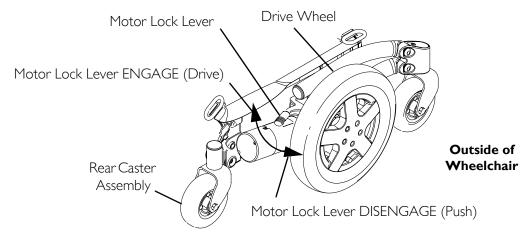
Disengaging/Engaging Motor Lock Levers
